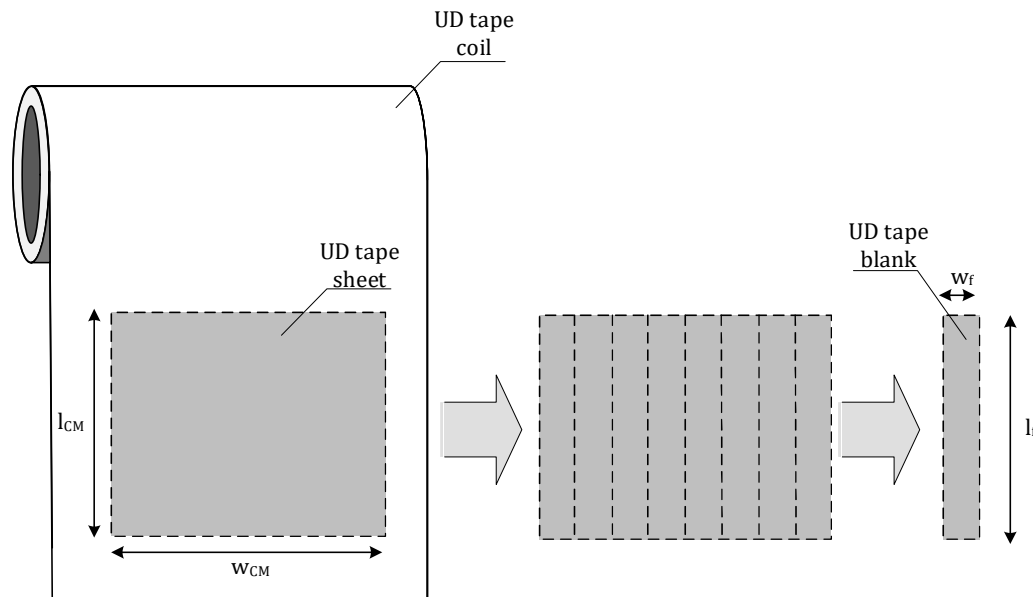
Preparation of 1UD facesheet blanks from the as-received UD tape roll: cutting a sheet from the roll and subsequent preparation of the UD tape facesheet blanks.
